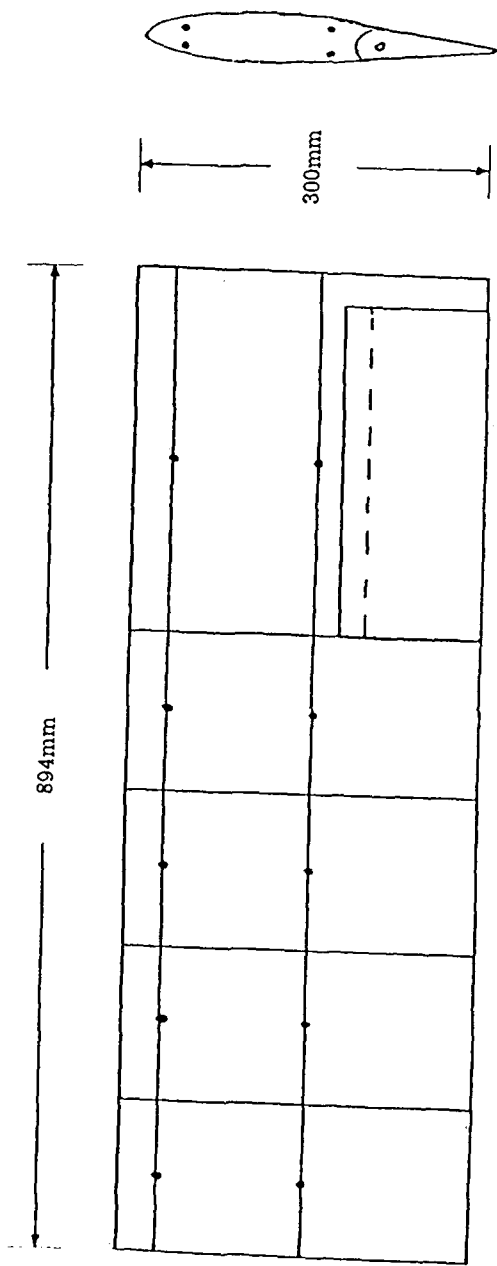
Plan View Of Model Wing With A Sketch Of The Airfoil Section
